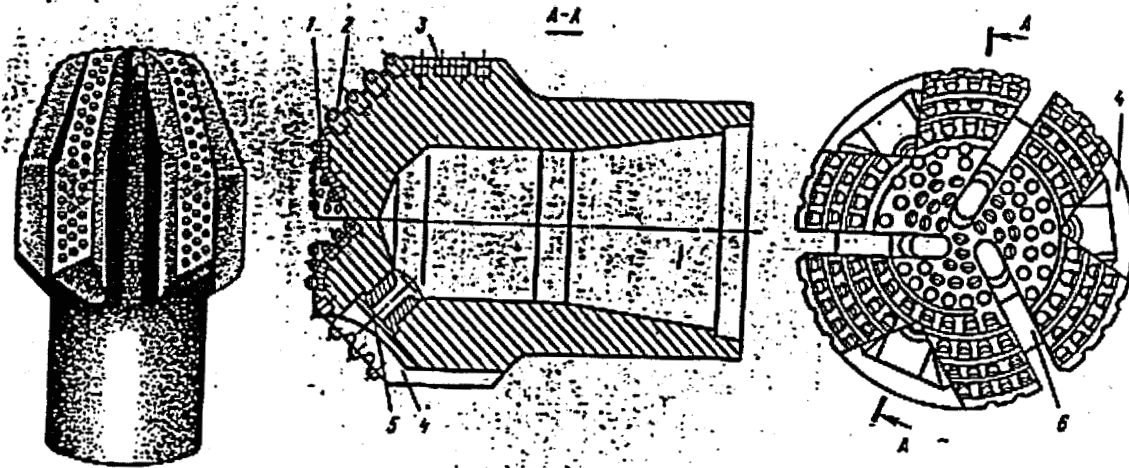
Chisel drill bit with WC/Co, diamond or diamond/carbide/metal composite inserts. The inserts wear a stone like a dull cutters. 1)-3) inserts; 4)channels; 5)nozzle;
